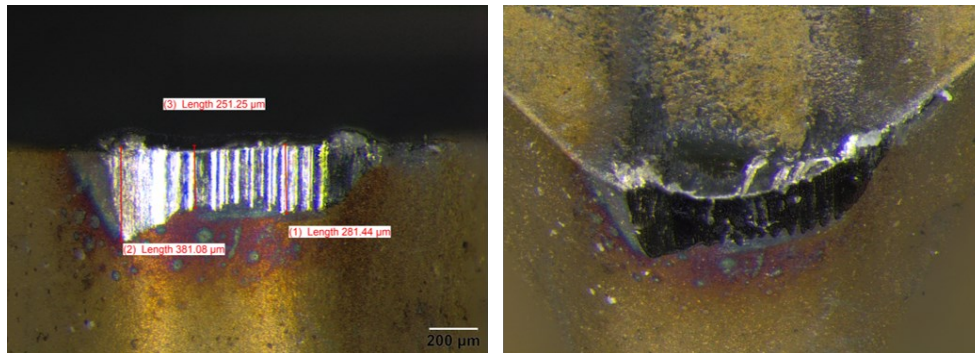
TiN flank (left) and flank+rake (right), machined at 60 m/min for 1.5 min in argon.
